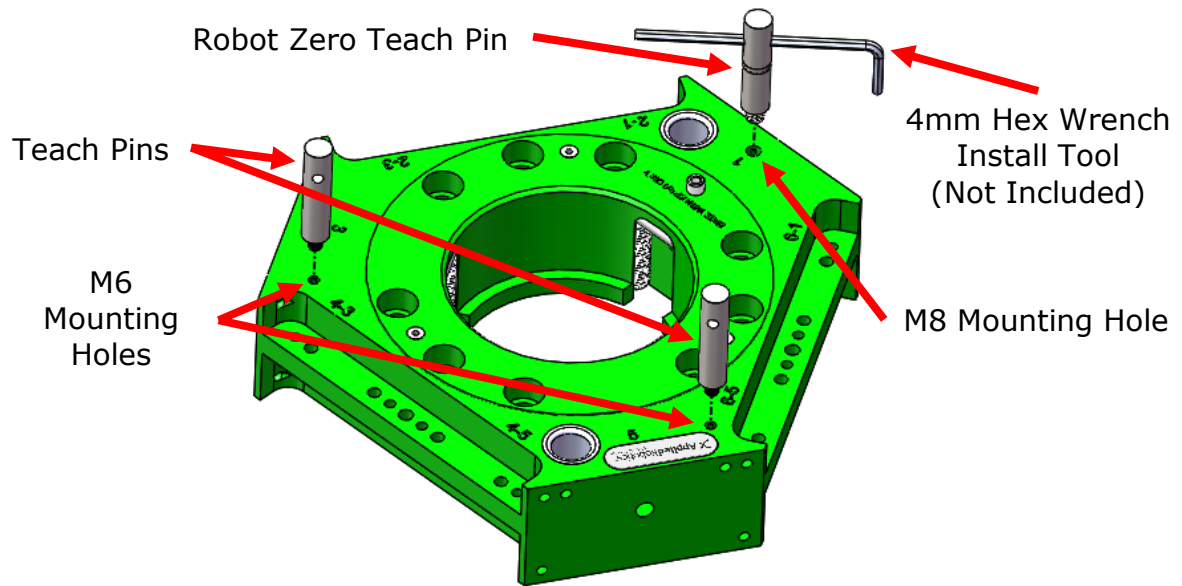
Teach Pin Mounting – E160 Tool Side
